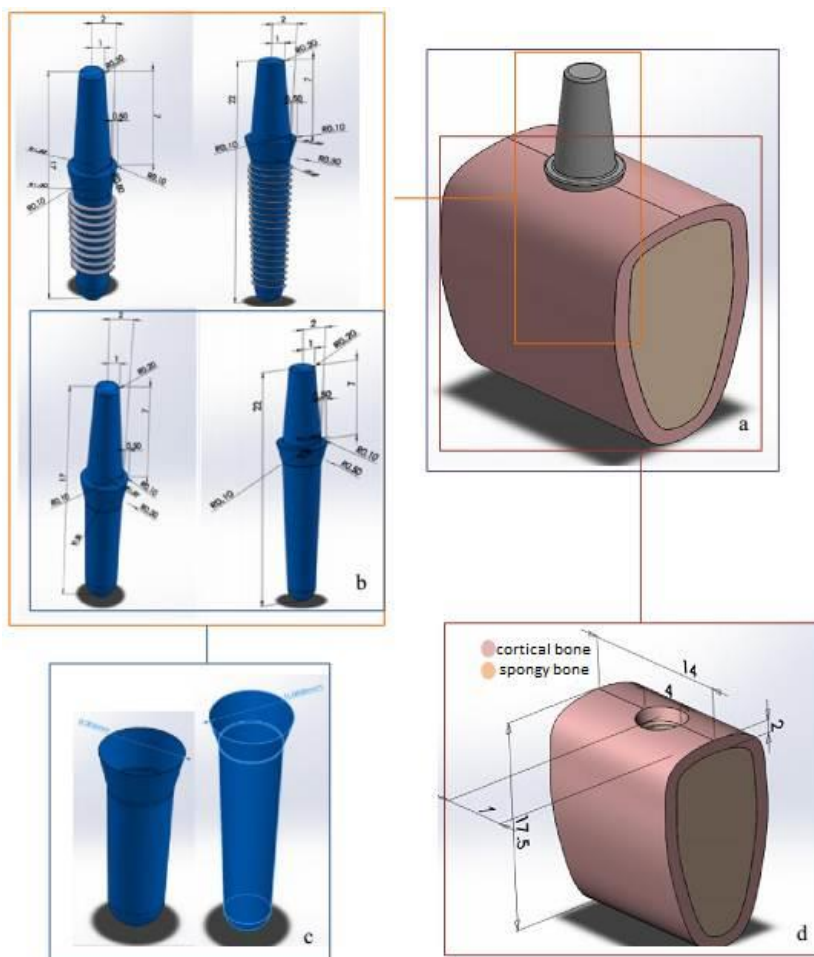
The bone / implant system design. (a) the complete model; (b) the dimensions of long and short implants with and without threads; (c) the coatings (short and long); (d) the dimensions of the bone
